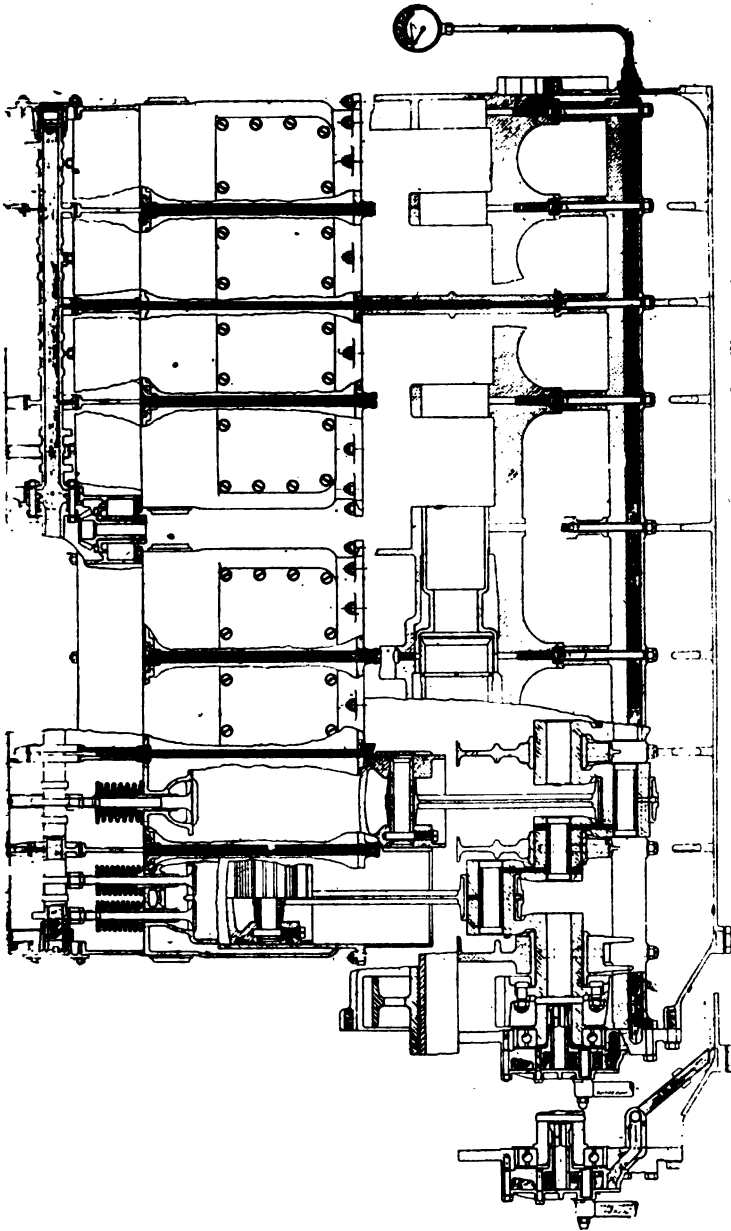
Longitudinal section of the King-Bugatti engine, showing the oiling system
